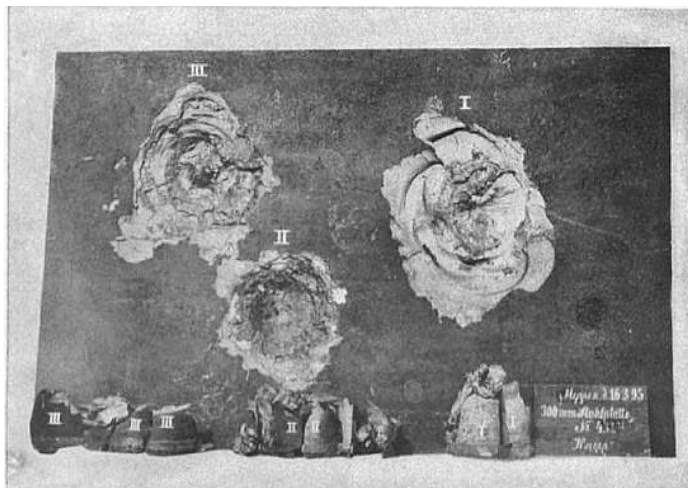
KRUPP-CEMENTED PLATE, 11.8 INCHES THICK, AFTER ATTACK. (KRUPP, MEPPEN.)
